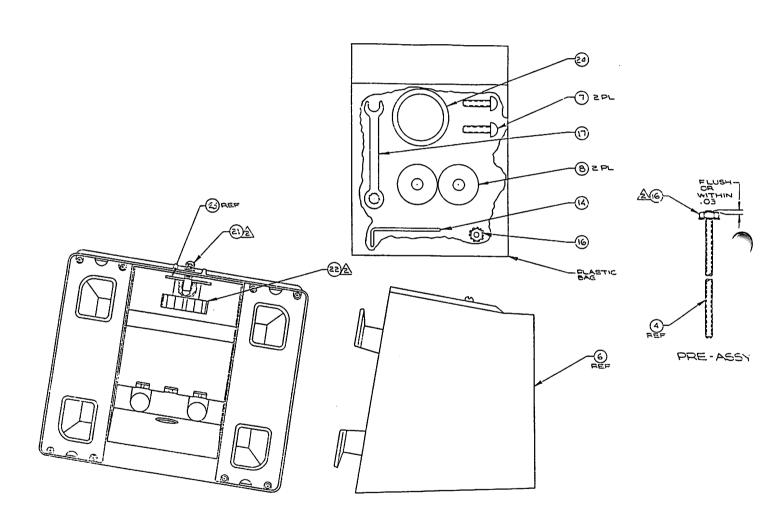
C. Model 1042 Instrument Stand Final Assembly
